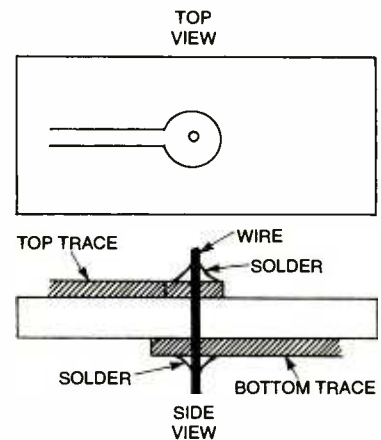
A poor-man's via is simply a small hole with pads on both sides of the board, in which a small piece of wire is inserted and soldered to both sides of the board.
